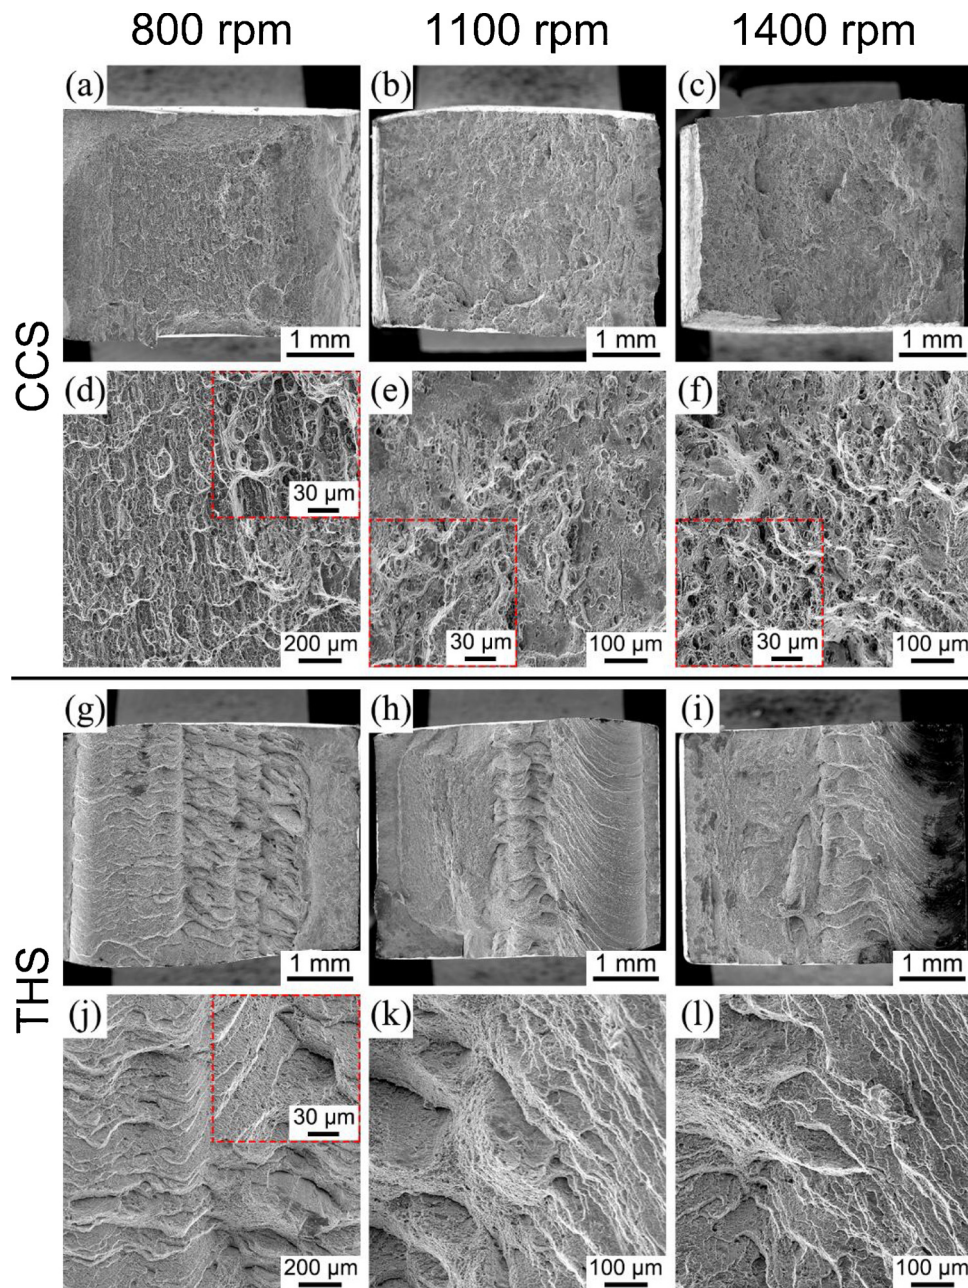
Tensile fracture features of the dissimilar joints: (a and d) CCS-800, (b and e) CCS-1100, (c and f) CCS-1400, (g and j) THS-800, (h and k) THS-1100 and (i and l) THS-1400.
